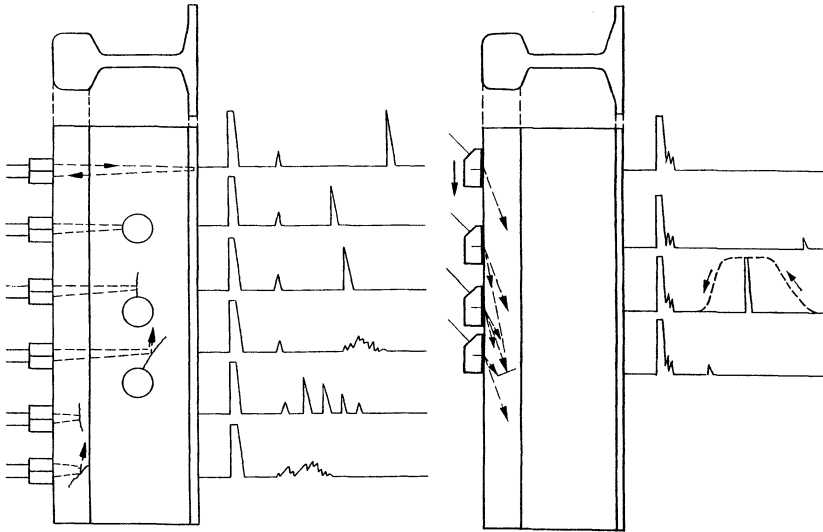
Indications of various rail defects by perpendicular and oblique testing
